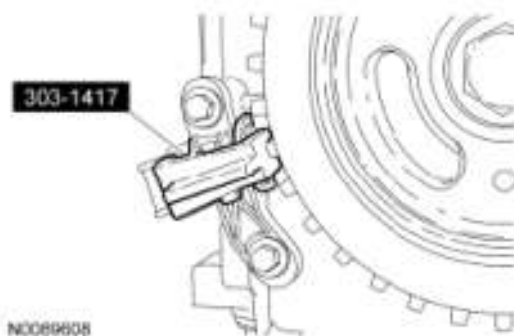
Identifying CKP With Crankshaft Sensor Aligner
